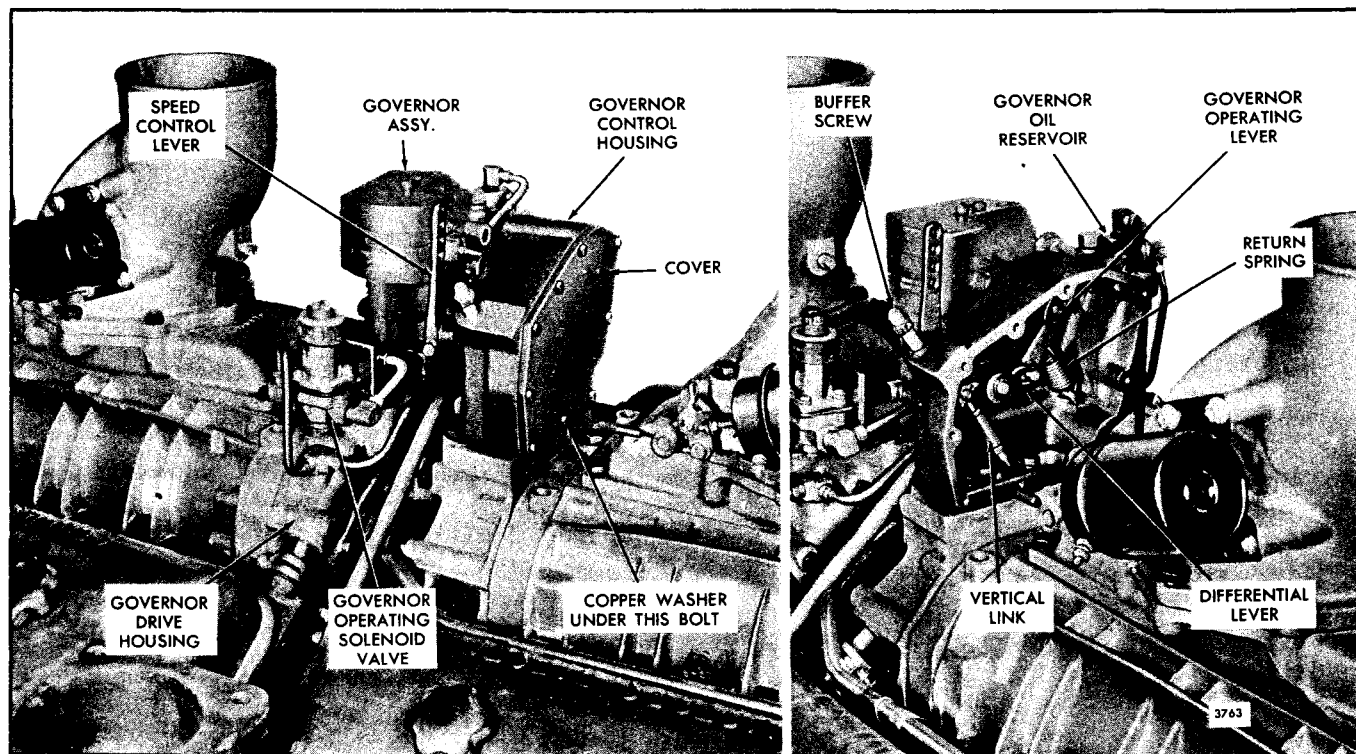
Governor Mounting and Linkage in the Control Housing
